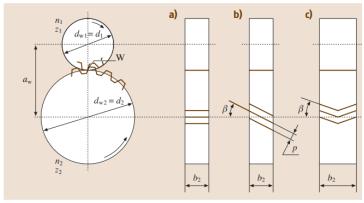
PARALLEL AXIS GEARING WITH EXTERNAL TOOTHING. (A) STRAIGHT TOOTHER/SPUR, (B) HELICAL, (C) HERRING-BONE TAKEN FROM PAGE 334 OF SPRINGER HANDBOOK OF MECHANICAL ENGINEERING [37]
